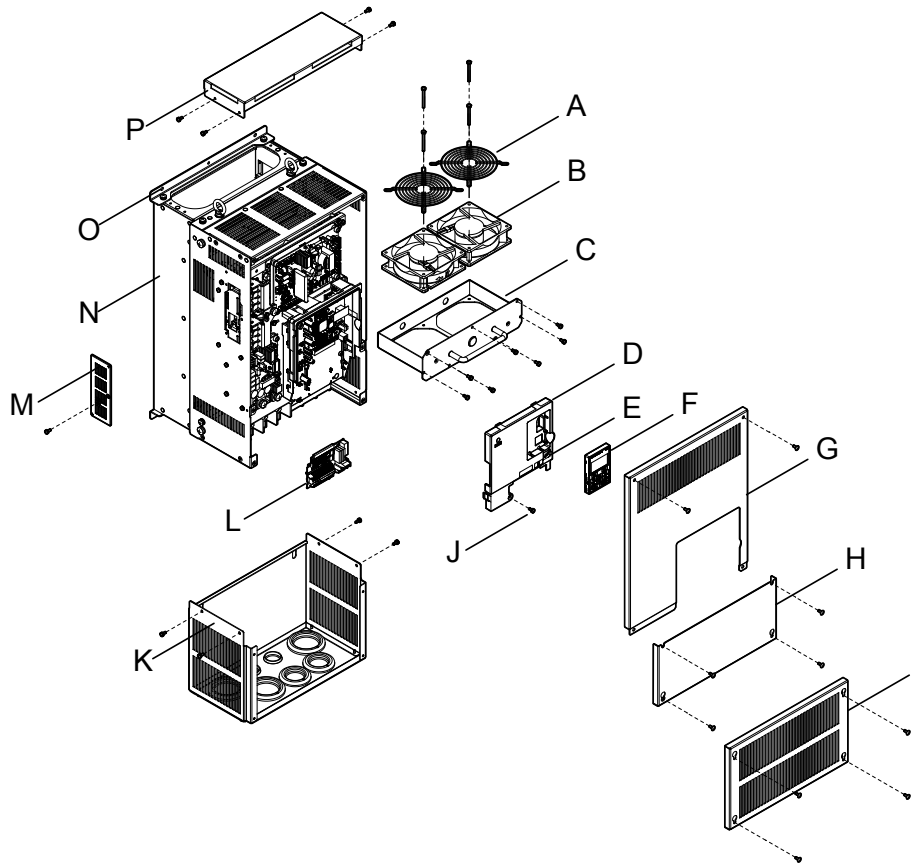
Exploded View of IP20 Enclosure Components (Model 2A0110F)
